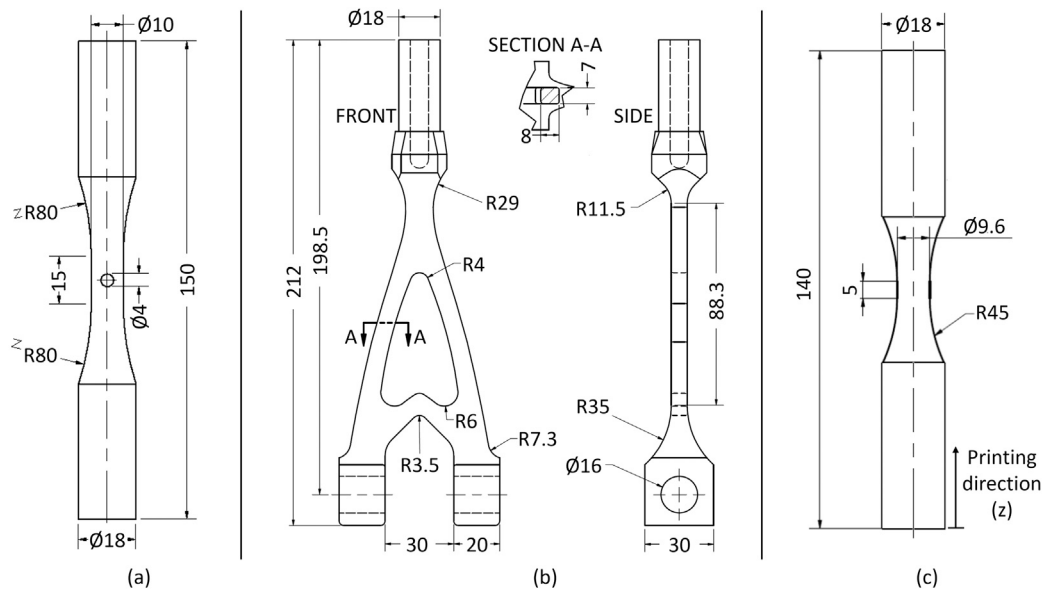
Geometry of the specimens employed in this study. (a) HL specimen. (b) WB specimen. (c) HCF specimen from [6]. All dimensions are in [mm].
